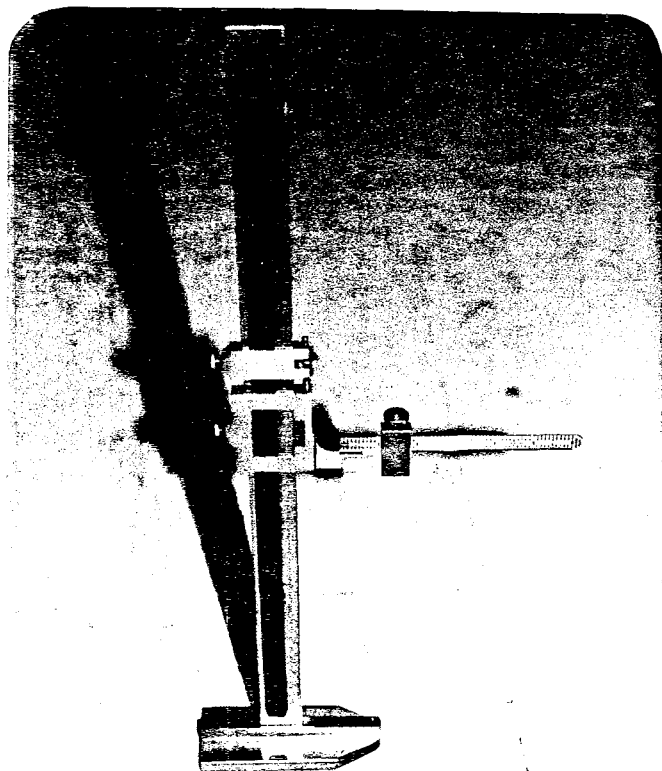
VERNIER CALIPER TO MEASURE THE HEIGHT OF THE TEST SPECIMEN
